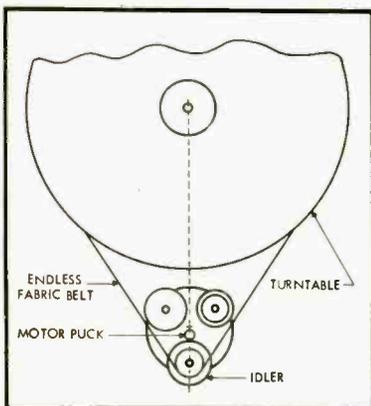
"Straight-line" drive involves positioning of motor, idler-pulley, and turntable centers all on one line.
